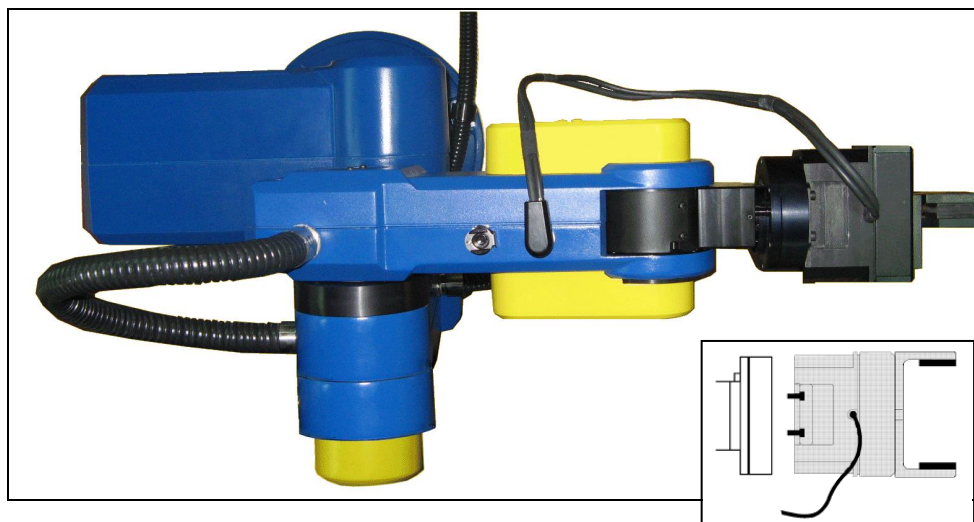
Attaching Gripper to SCORBOT-ER 9Pro
